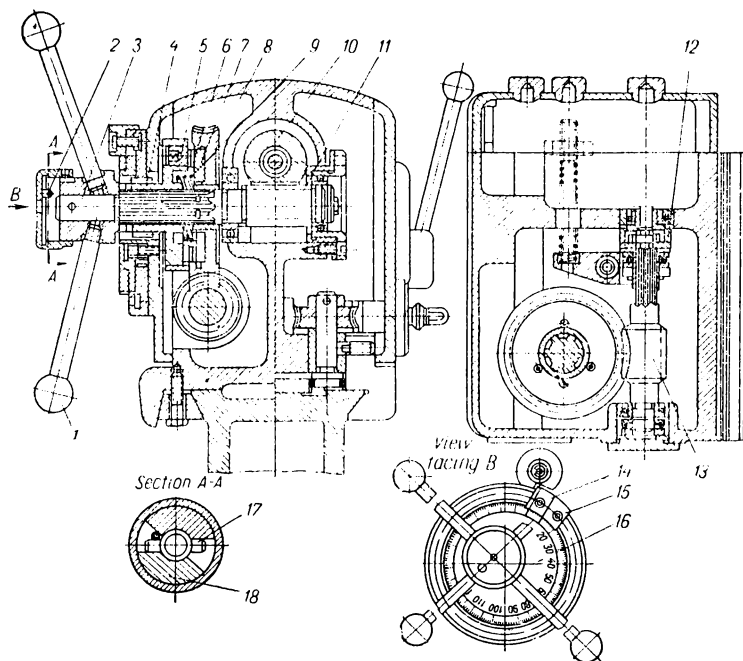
Feed mechanism of the upright drilling machine, model 2A135
